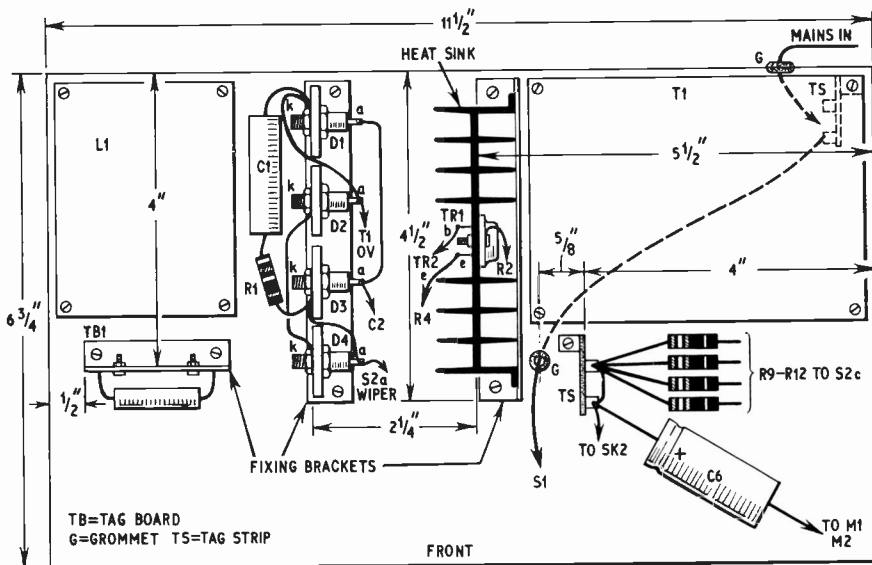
(above). Layout of components on top of the chassis. Drilling details are made to suit the components used. More detail is shown in the photographs and in Fig. 4
